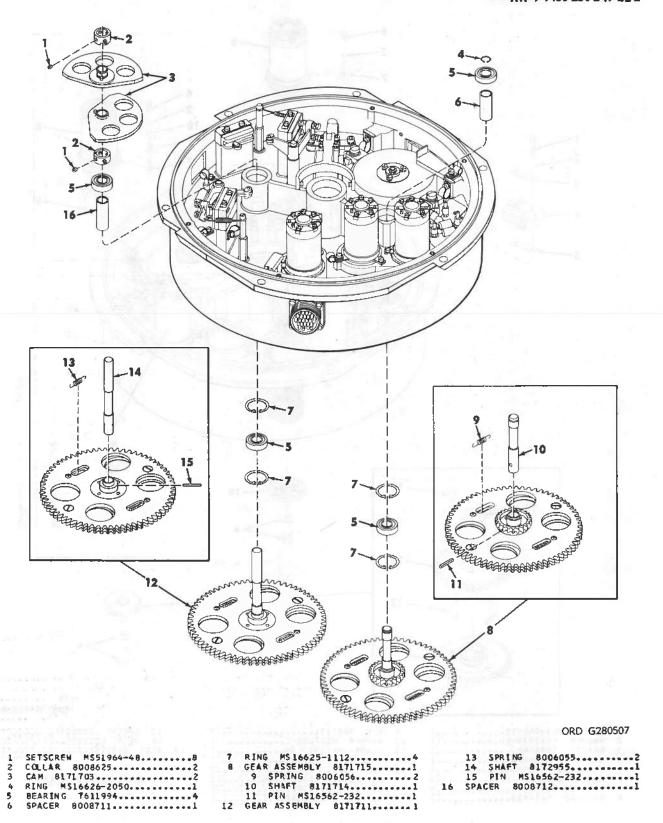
TRANSMITTER, POSITION, GUIDED MISSILE /9007947/-PARTIAL EXPLODED VIEW
